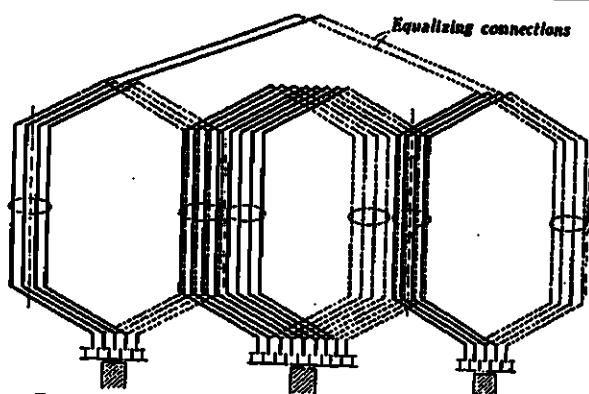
Arrangement of armature winding in single-phase series motor, type KJ 136.
